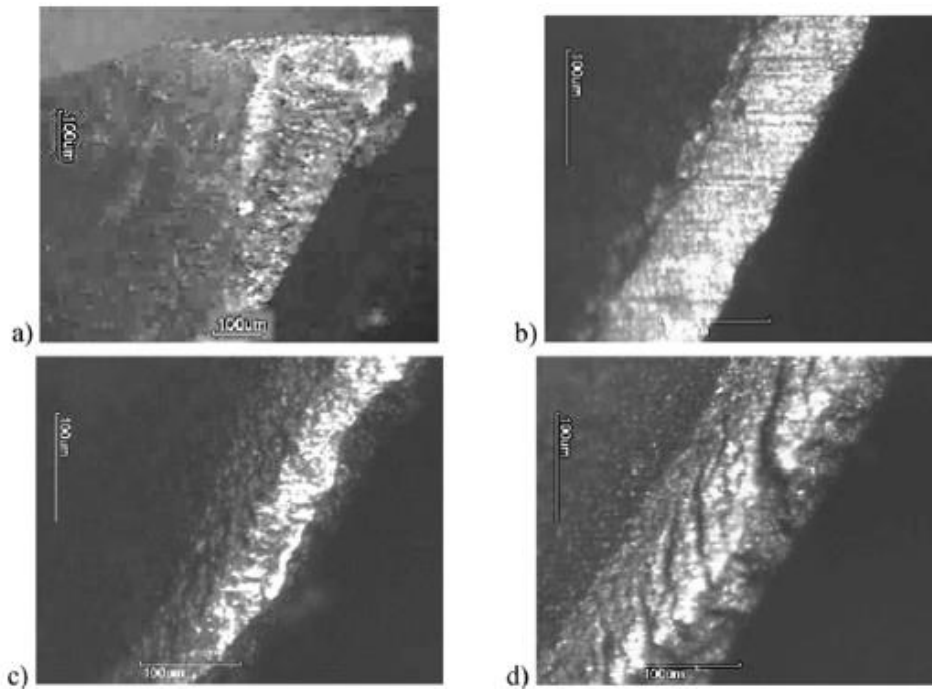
The examples of the tool wear, (a) fatigue failure of the cutting wedge - cutter no. 13 after 10 transitions; (b) uniform chipping of the cutting edge - cutter no. 6 after 12 transitions, position IV.; (c) non-uniform chipping of the cutting edge - cutter no. 7 after 6 transitions, position II.; (d) specific wear including cracks on cutting edge - cutter no. 11 after 4 transitions, position III.
